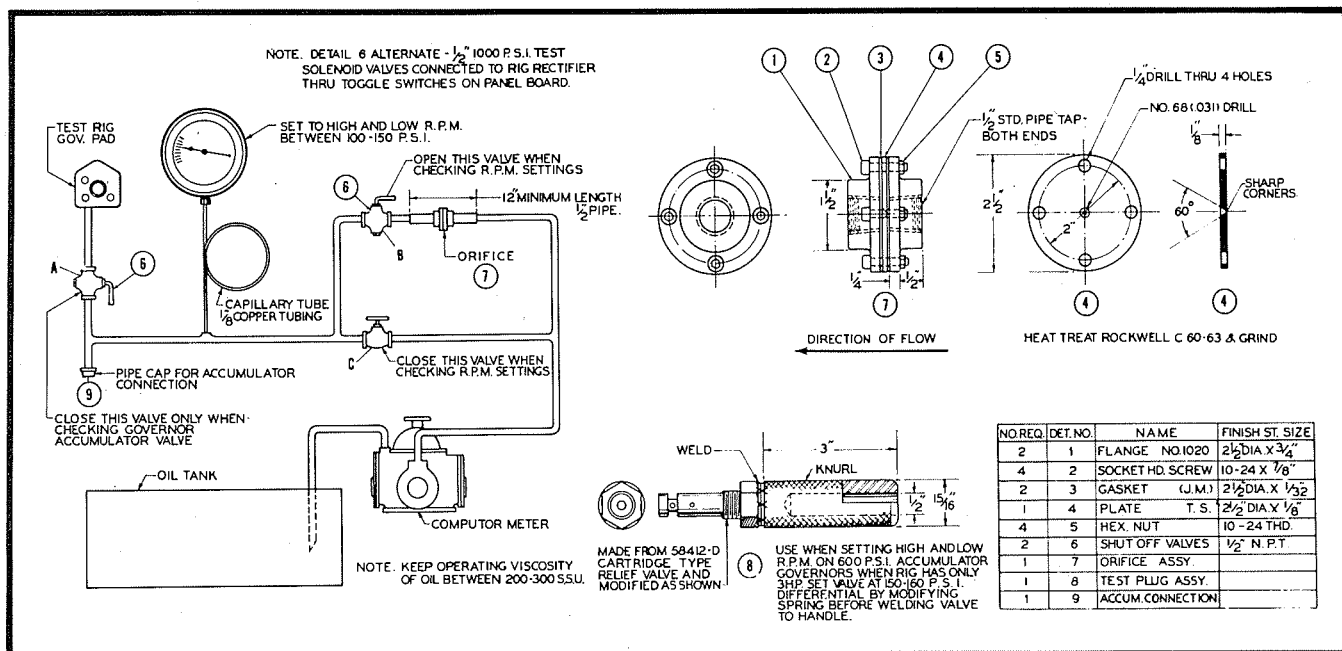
Piping Layout for Modifying Non-Standard Governor Test Rigs
